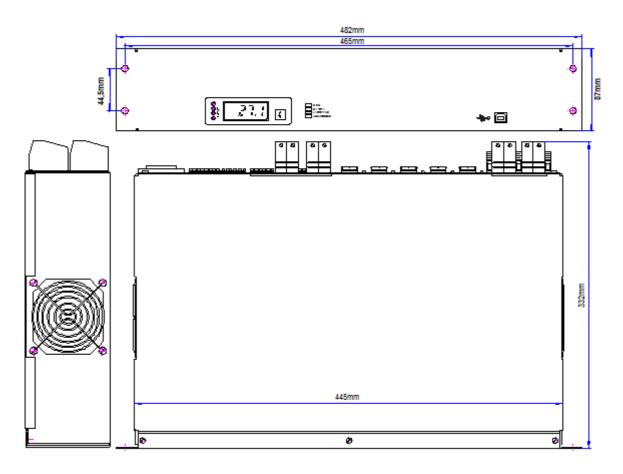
View and nominal dimensions of CHARGER 12 power supplies.
